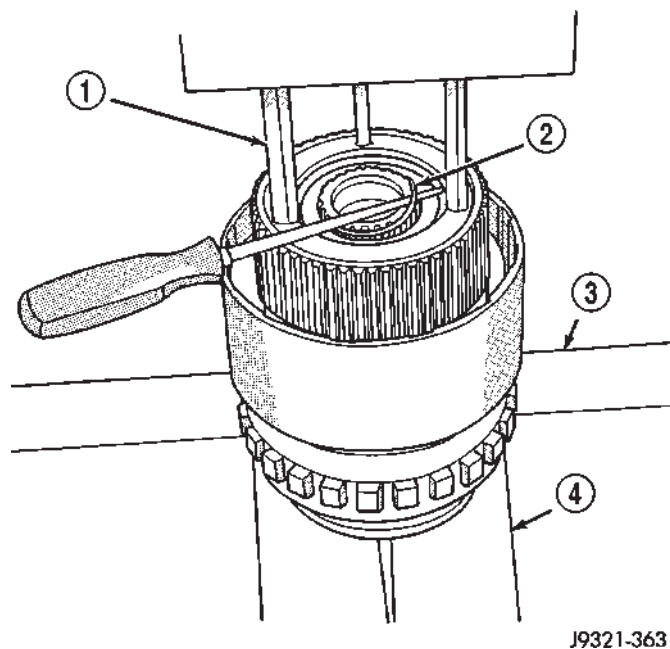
Direct Clutch Hub Retaining Ring Removal
